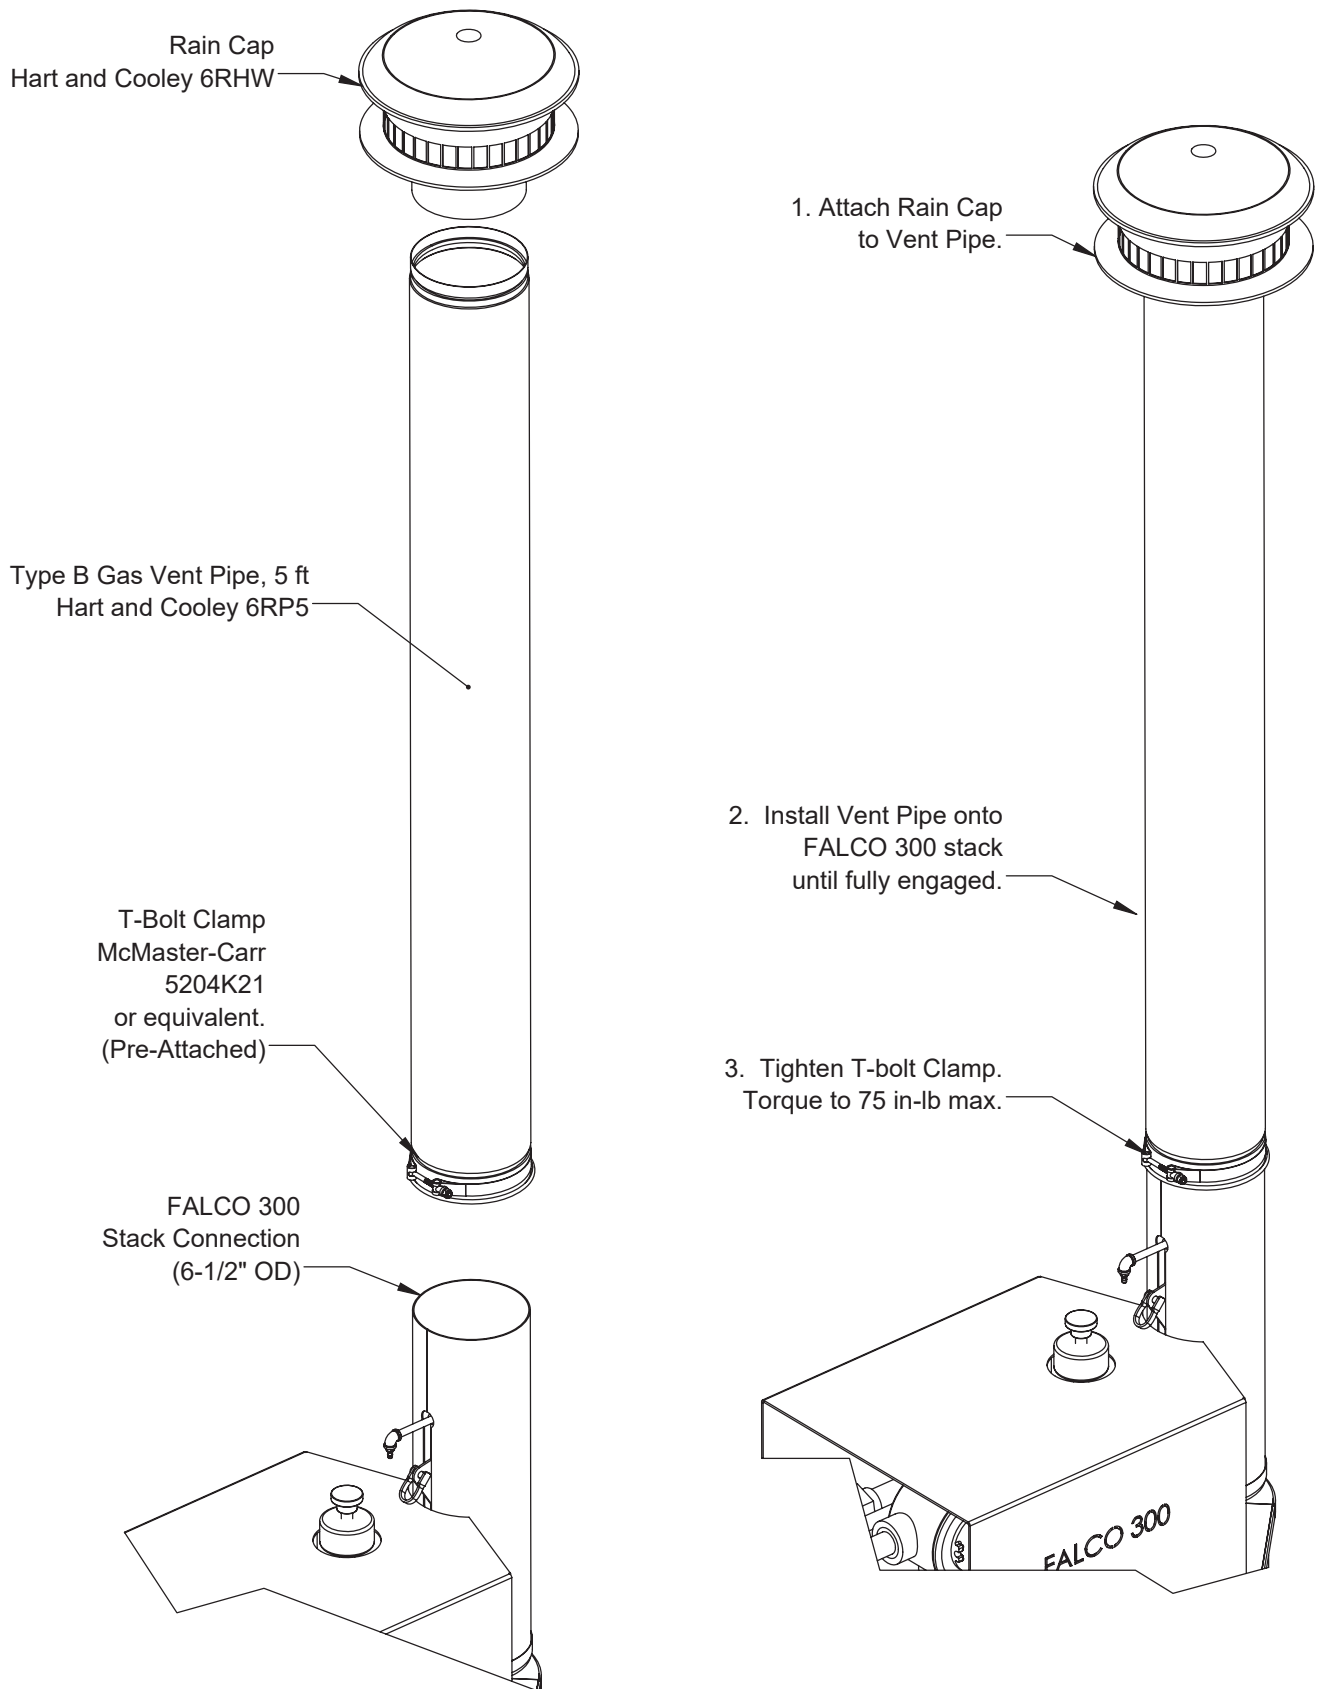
FALCO 300 VENT STACK (std) INSTALLATION
